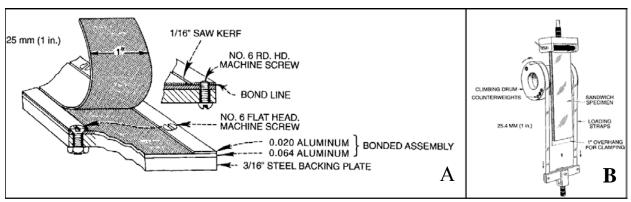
A) Diagram of laminated test specimen assembly, B) Assembly of peeling apparatus [12]
